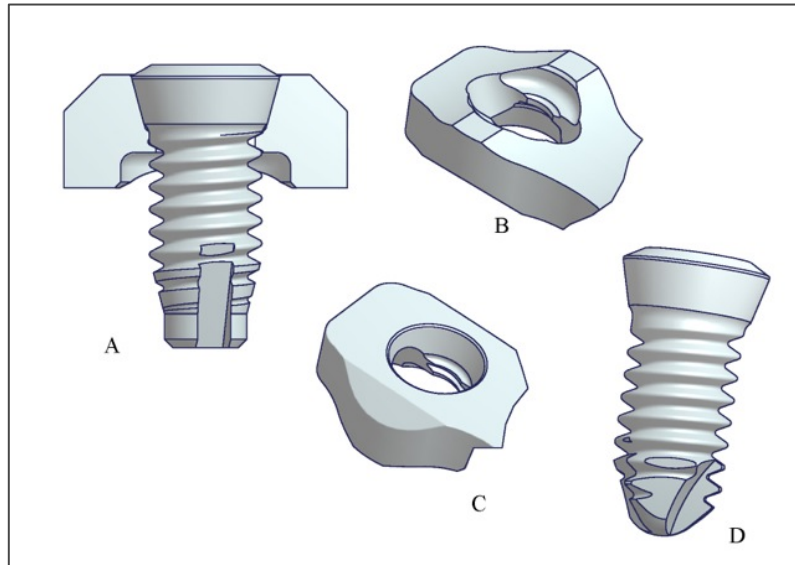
(A) Cross section of a plate/screw through the plate-hole showing the conical shape of the screw-head locking within the plate-hole. Partial threads in the plate-hole contribute with the locking mechanism. A first generation screw is shown. (B) Perspective view of the plate-hole from bottom and (C) top showing the partial threads and the conical shape of the plate-hole. (D) Drawing showing a second generation screw with improved cutting flutes (Figures 1-6 taken with permission from www.kyon.ch, Kyon Pharma, Inc. Zurich, Switzerland)
